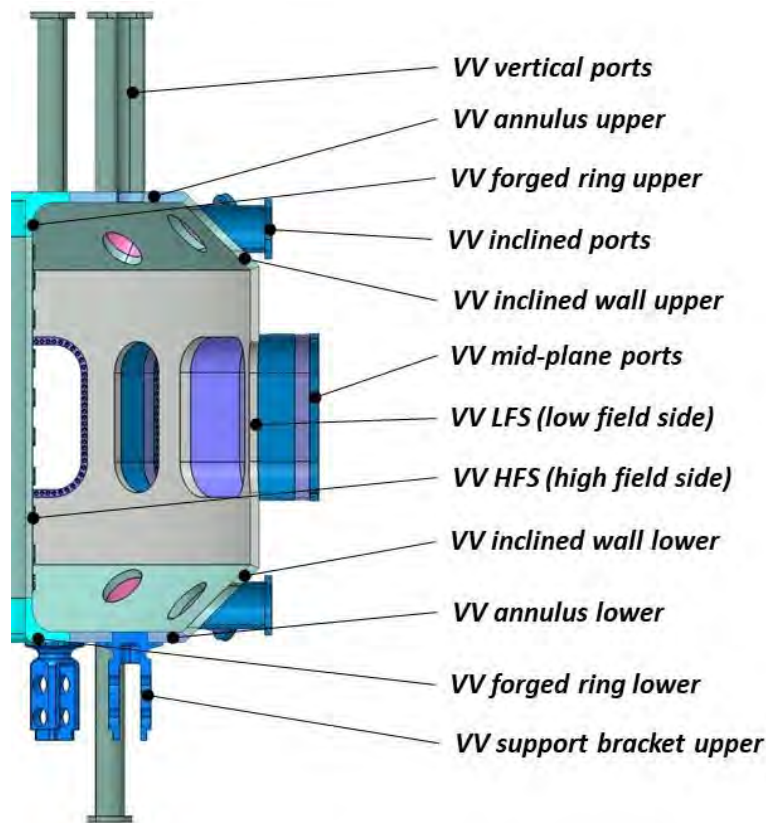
Overview of the individual (welded) components forming the core of the VV main body weldment
